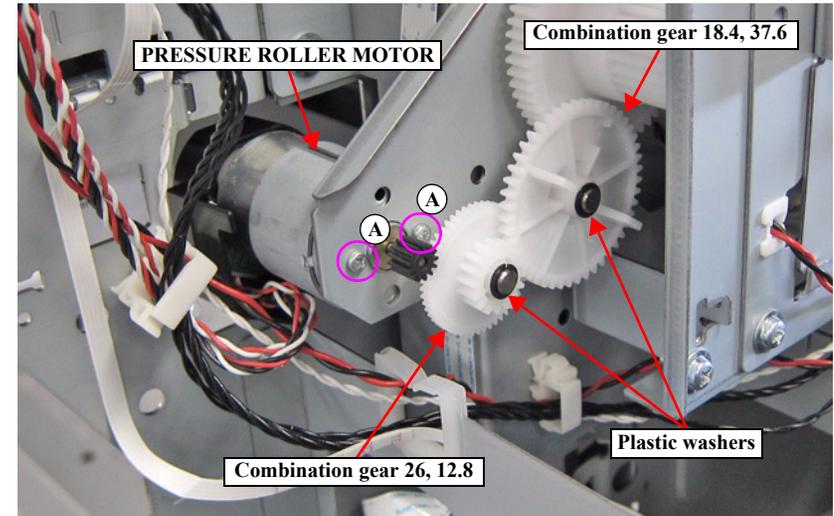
Removing the Combination gear 26, 12.8 and Combination gear 18.4, 37.6
